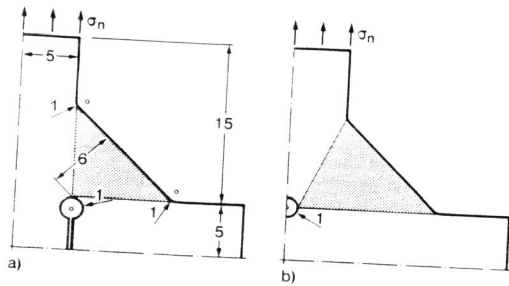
Tension loaded cruciform welded joints; transverse stiffener joint with fillet welds (a) and cruciform joint with double-bevel butt welds (b), cross sectional models of symmetry quarter drawn with $\rho r = 1$
